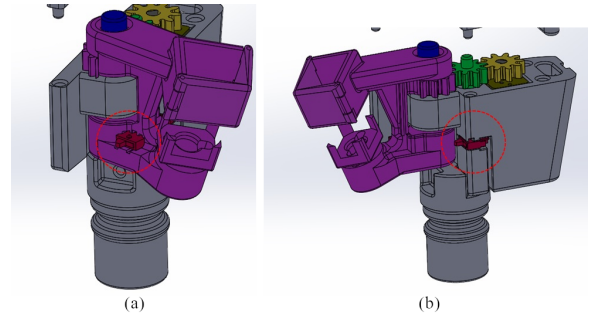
Position of maximum flexion and extension detection for the TCM joint. (a) Side view of extension and (b) side view of flexion.
